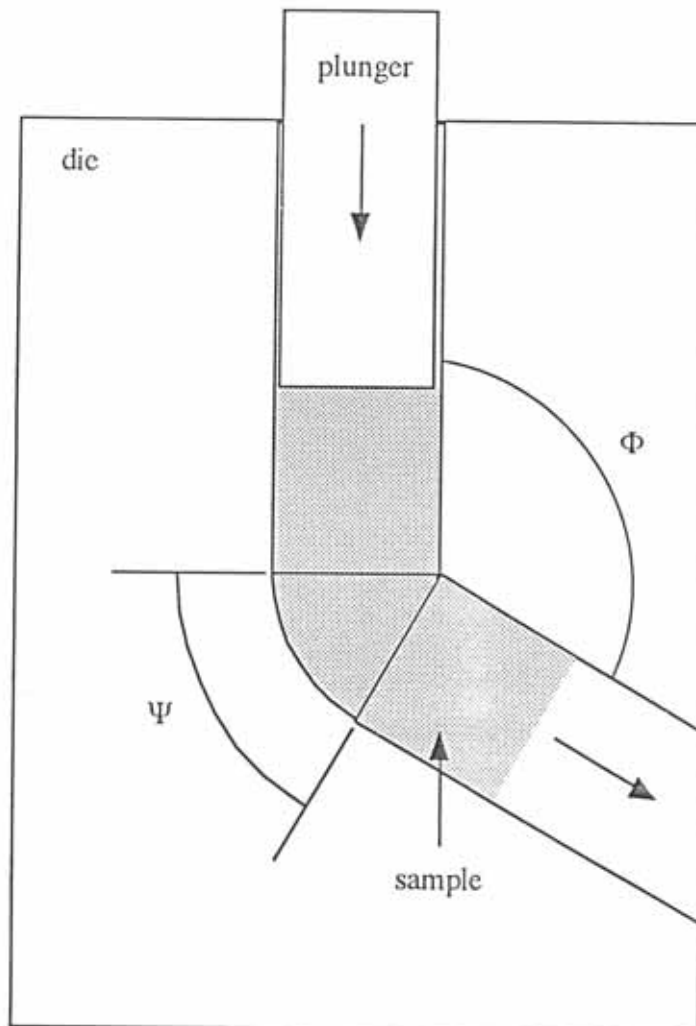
Schematic drawing of equal channel angular pressing.
